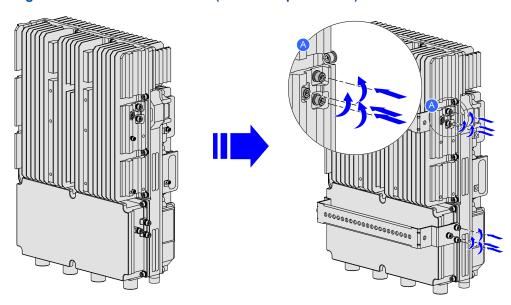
Install Device Hooks (Two U-shaped Hooks)
